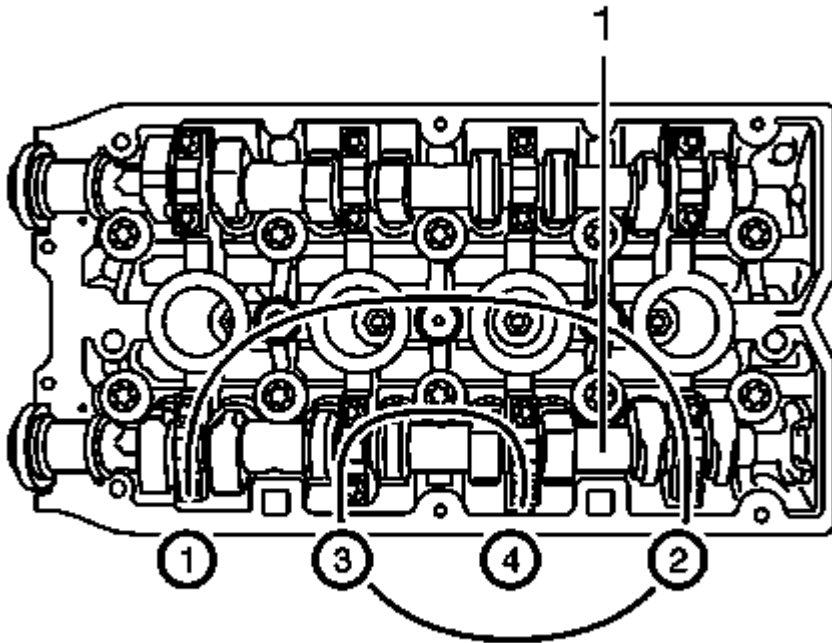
Exhaust Camshaft Bearing Cap Bolts Loosening Sequence
